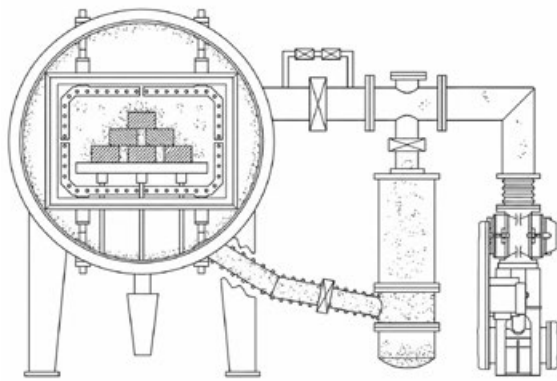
Vacuum dewax process (Courtesy Centorr Vacuum Industries)
